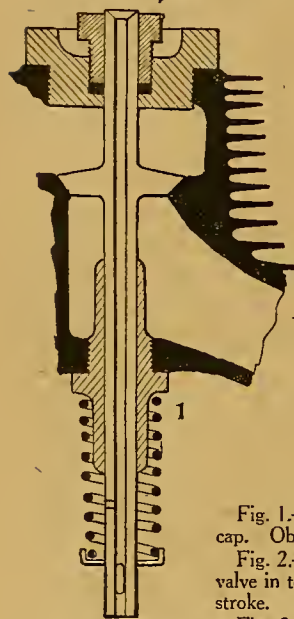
Hollow exhaust valve extended through valve cap. Object, circulation of cool air through centre.
